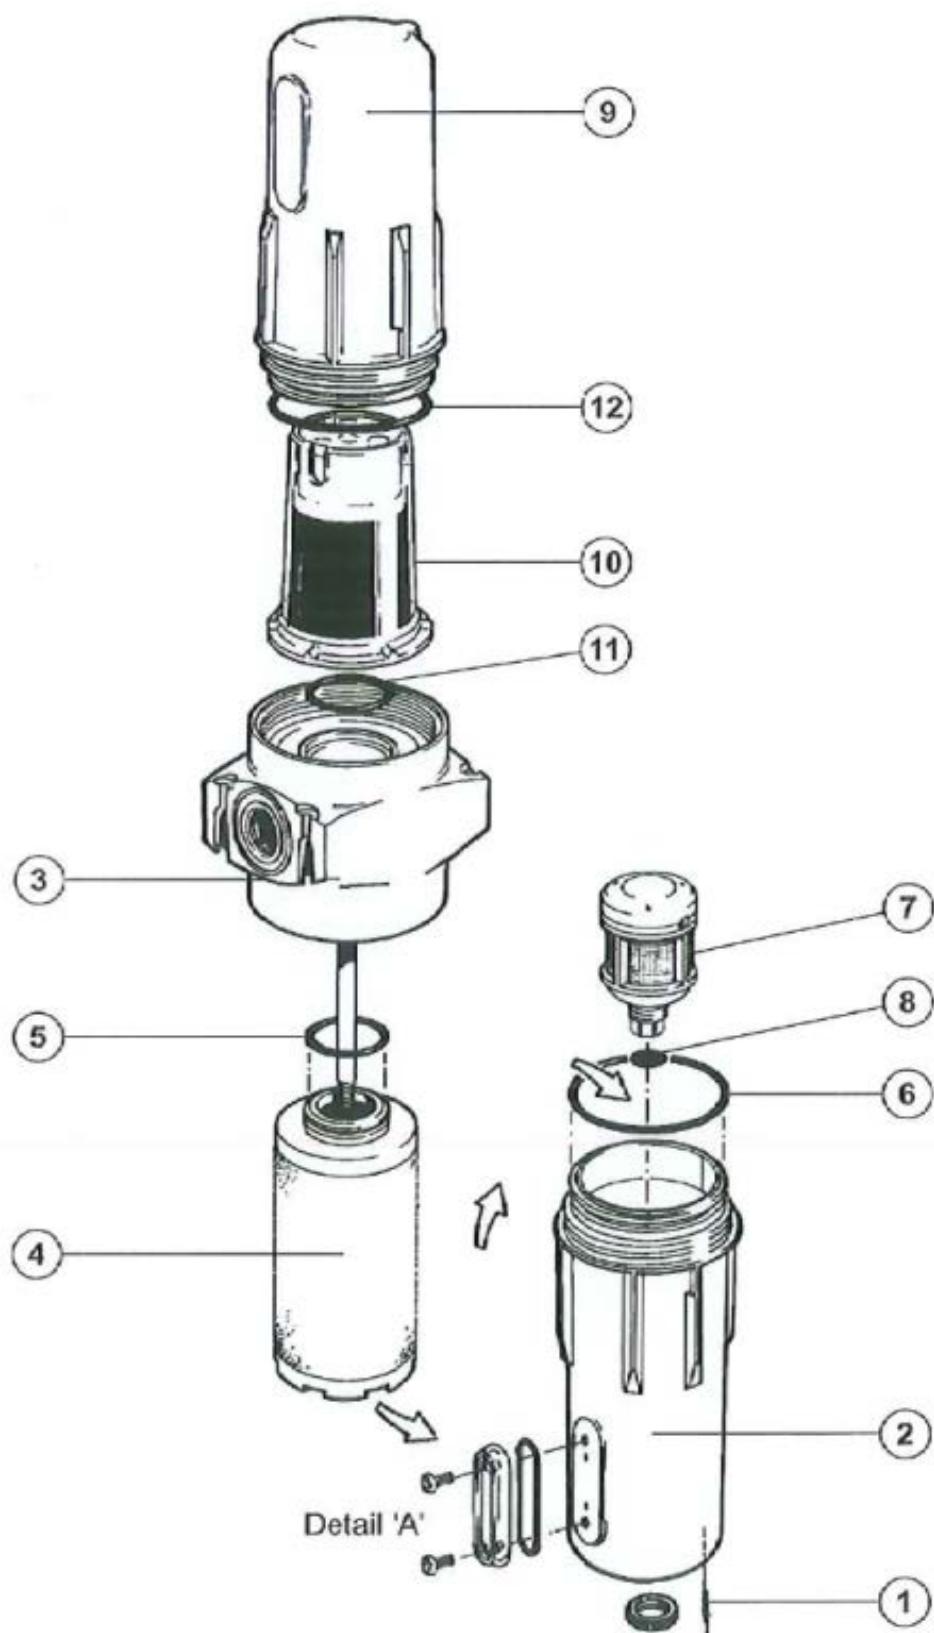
Exploded Drawing of 3rd and 4th Filtration Stages
